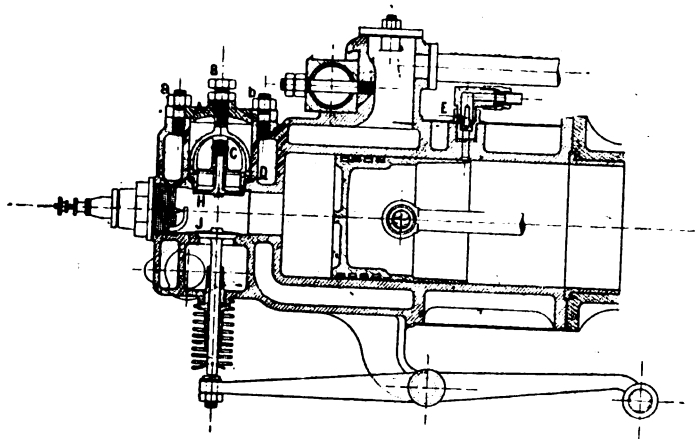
SECTION OF DELAHAYE MOTOR.
